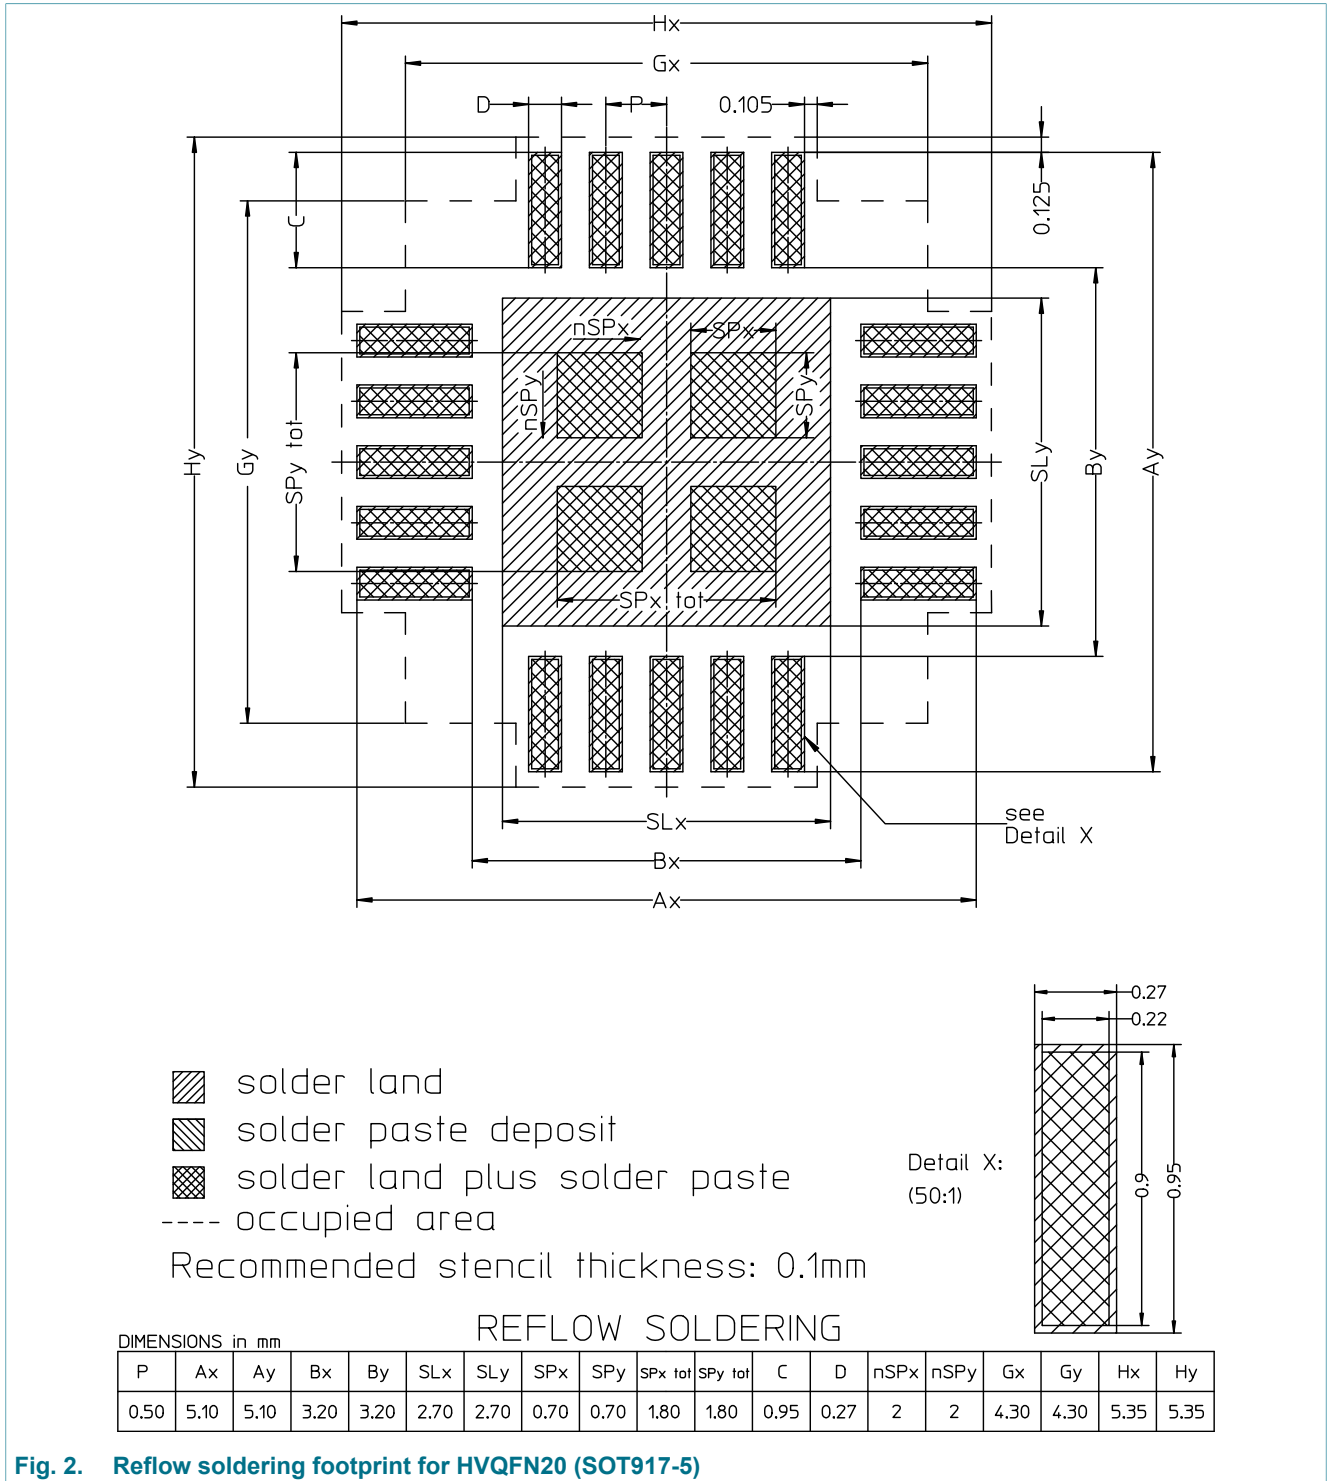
Reflow soldering footprint for HVQFN20 (SOT917-5)
